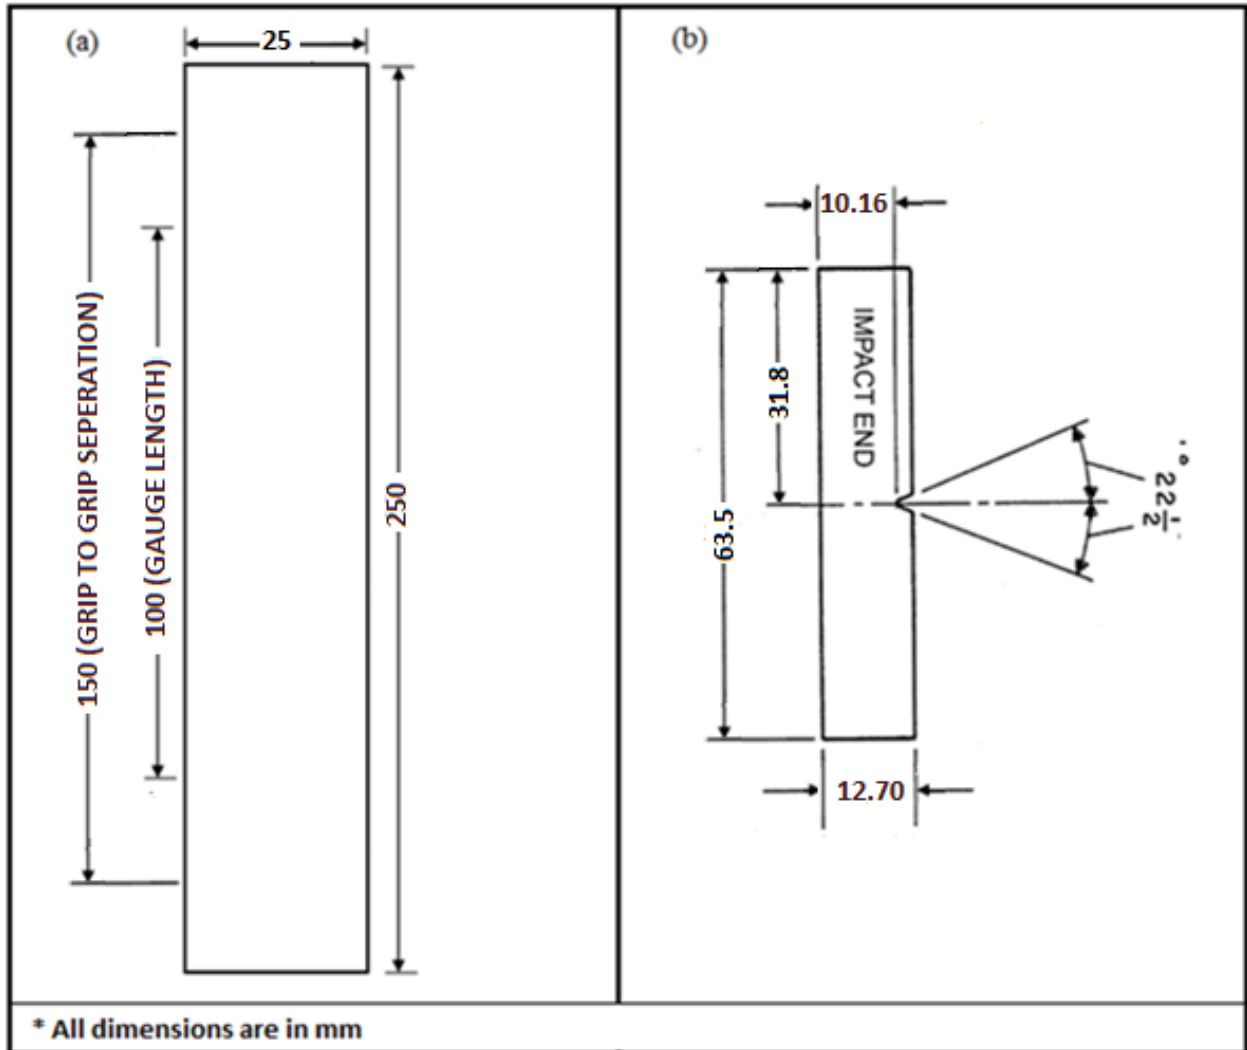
Schematic of a) tensile testing specimen and b) impact testing specimen.
